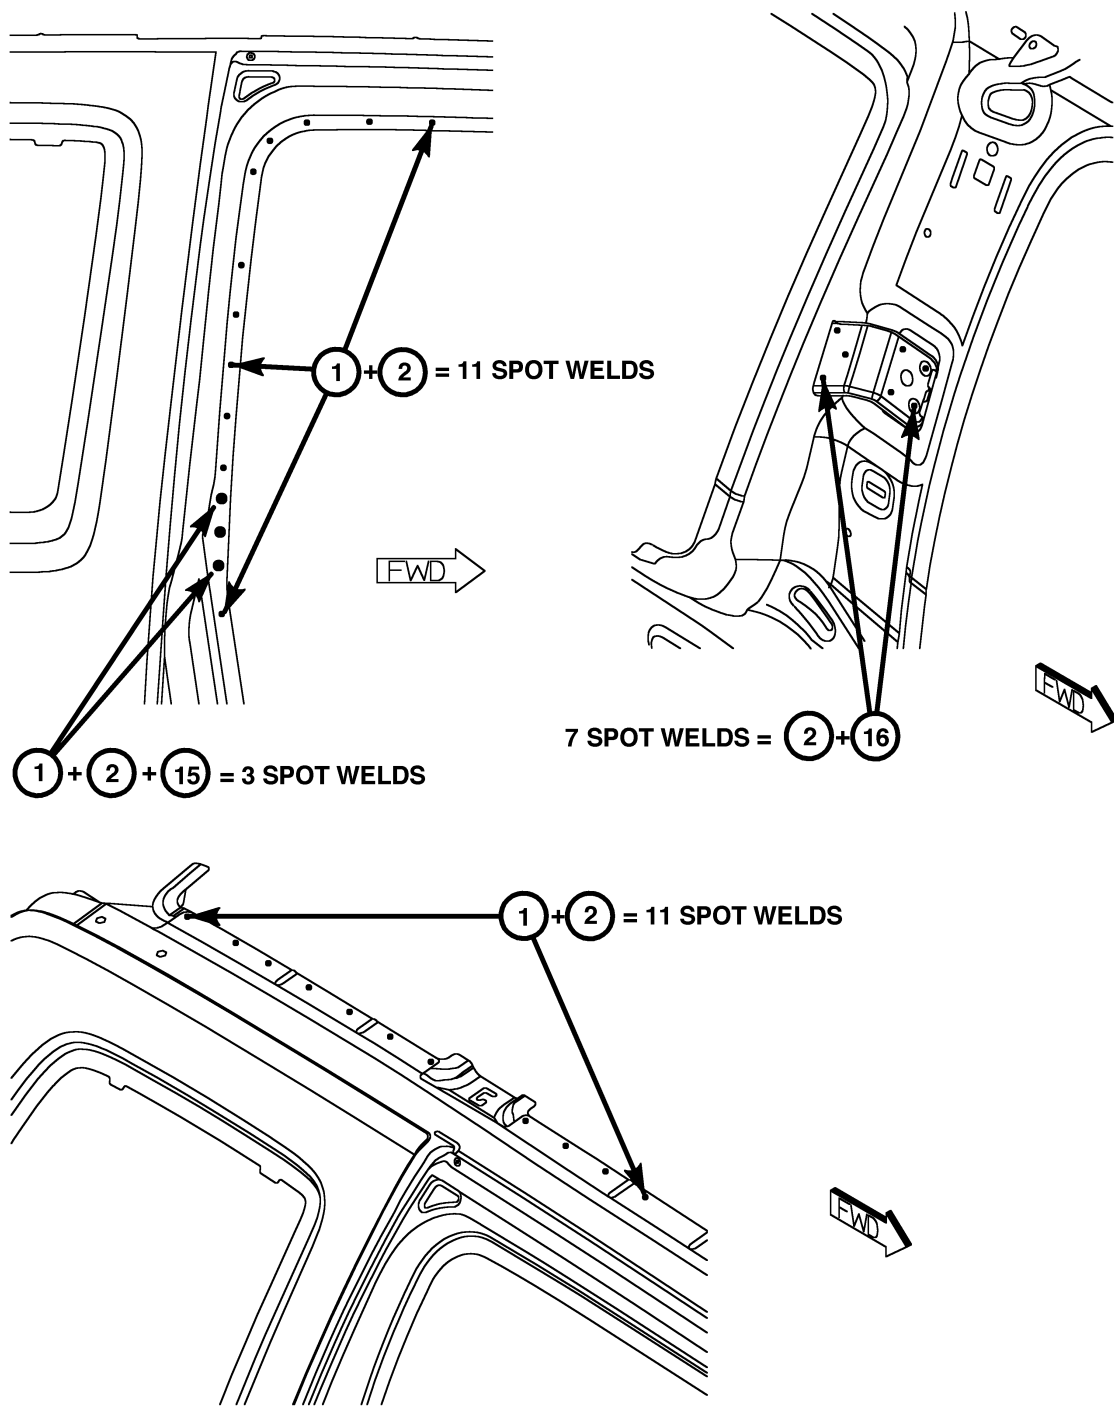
BODY SIDE PANEL ASSEMBLIES AND C-PILLAR REINFORCEMENT
